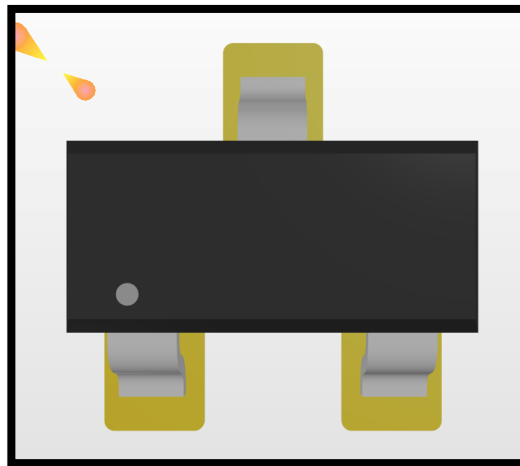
The 3D View of the NPN-BJT; BC817-40,215
